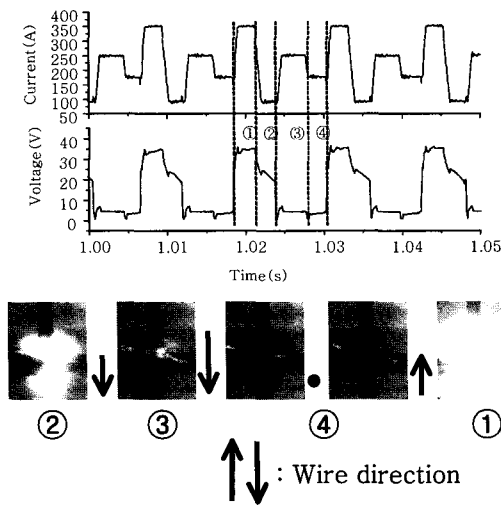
Welding waveform and high speed images by CMT process
